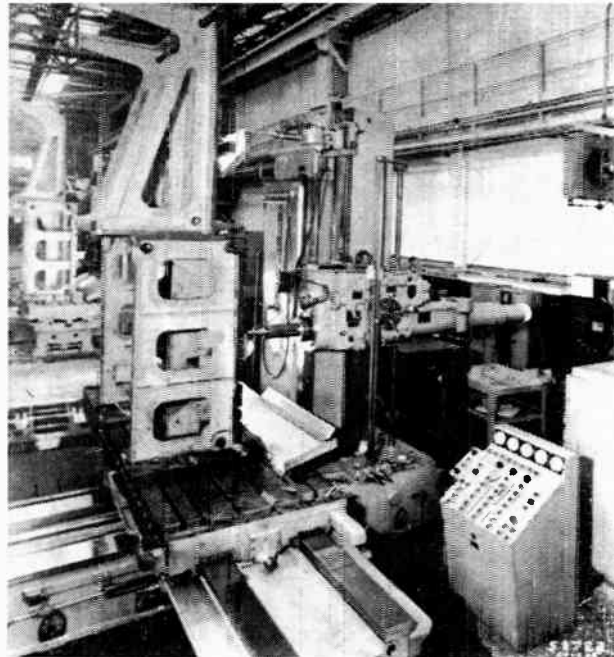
at right shows Giddings & Lewis boring machine under electronic control. Note 3-dimensional tracer head following contour tracer.
